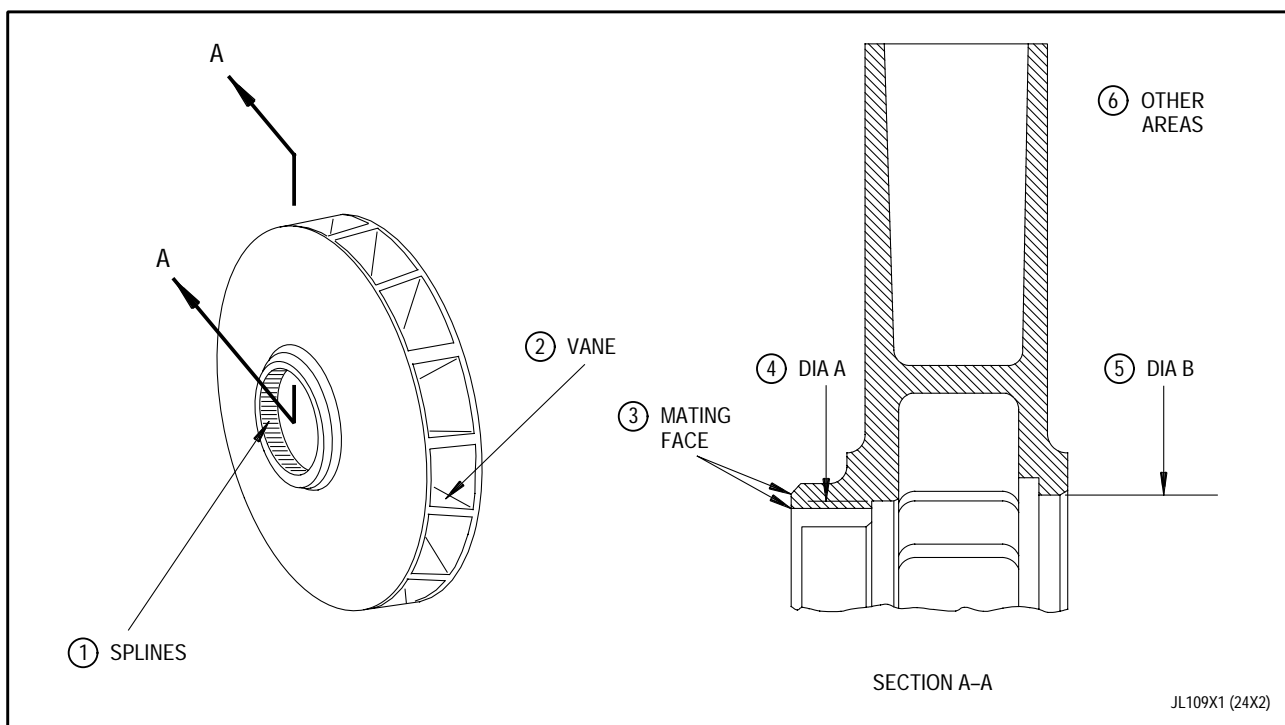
Gearbox Deaerator Impeller - Inspection
